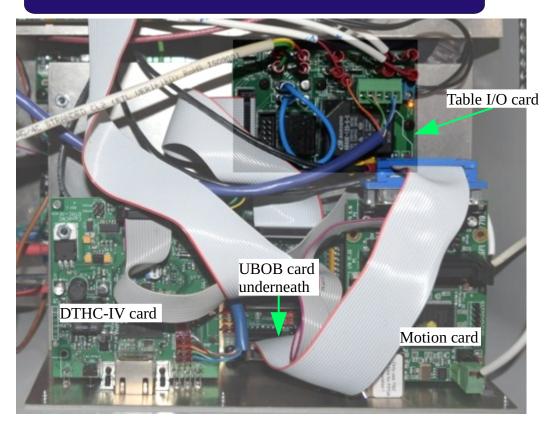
Plate assembly with UBOB, DTHC-IV, Table I/O, and Motion cards
